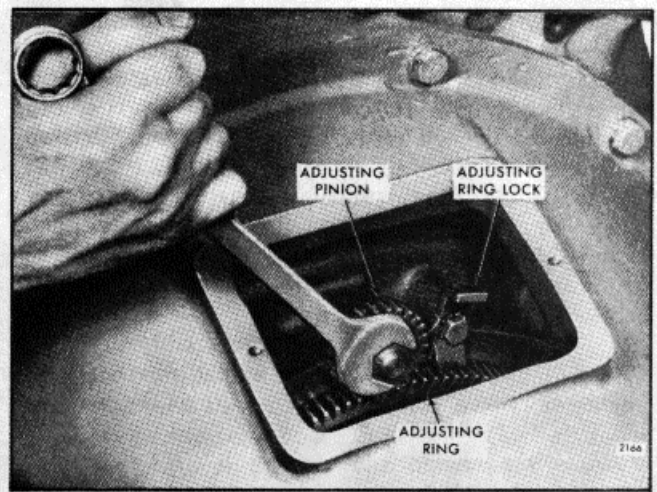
Power Take-Off Assembly Showing Method of Adjusting 18" Diameter Clutch
